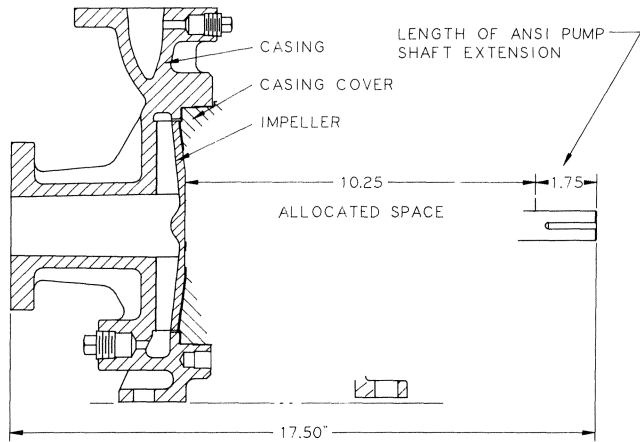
Allocated Space for Sealless Drive Mechanism Within ANSI B73.1 Dimensional Envelope for Size AA and AB Pumps.
